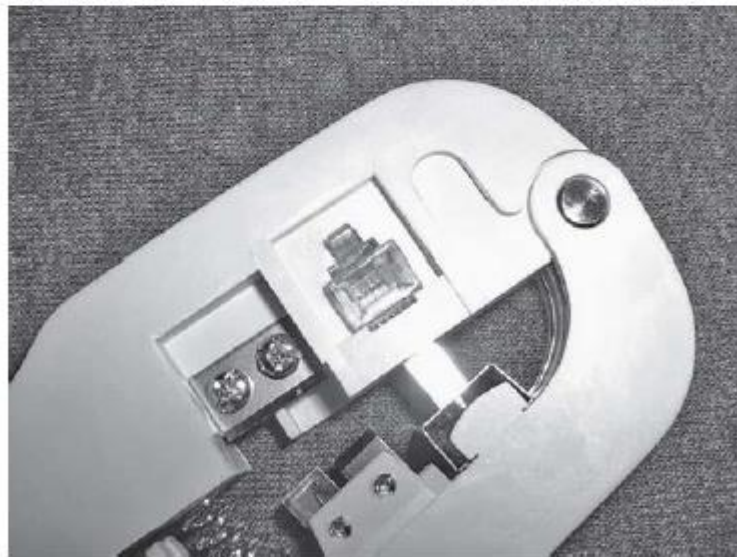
■ Modular Plug Properly Inserted into the Tool Cavity
